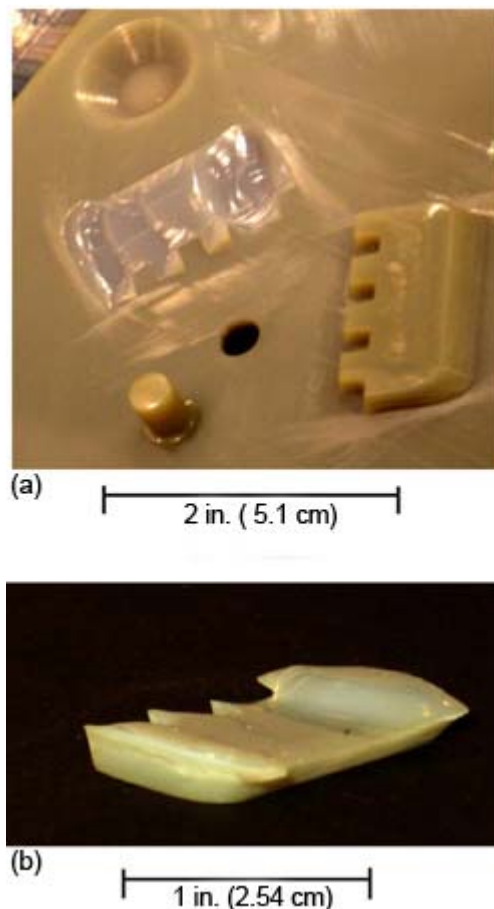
Core insert showing brittle fracture (a), tooth block after separation from core (b).
